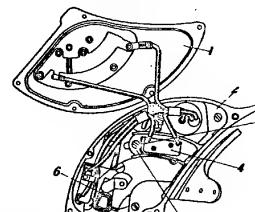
MIIΦ-2 Electric Mechanism Drive Box with Cover Open
